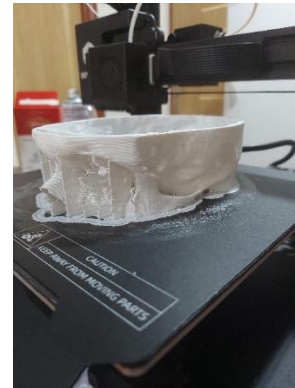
Skull of AHD Prototype using FDM 3D printer.
